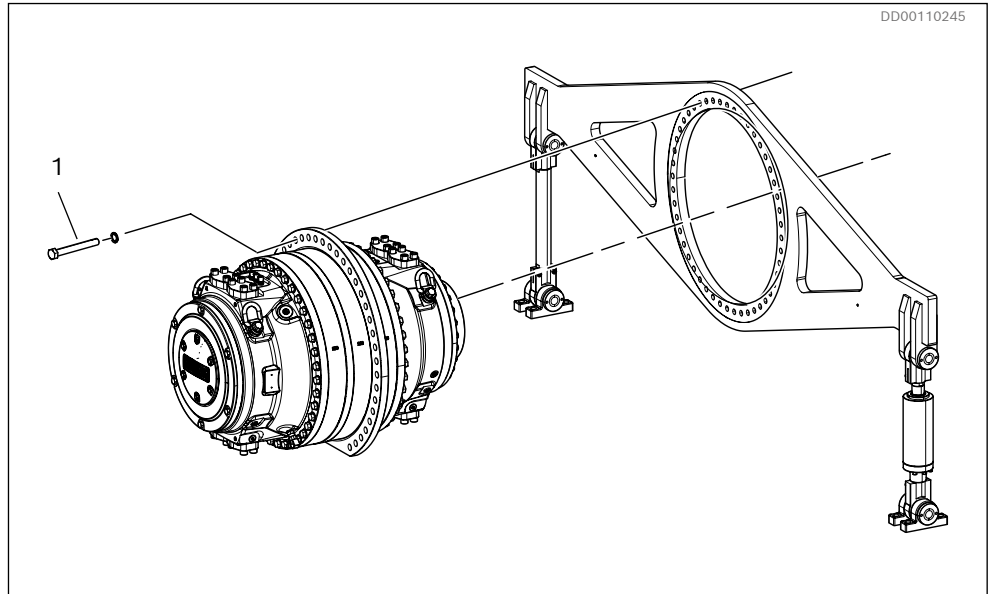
Example, mounting double ended torque arm DTCB_1120 for CBp 840
